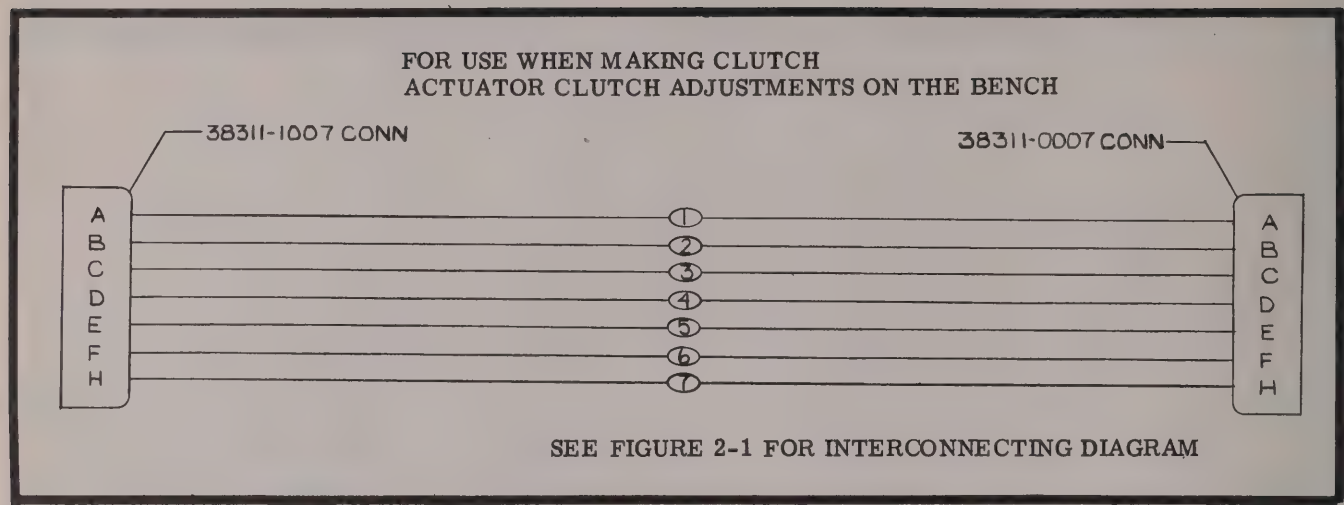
9799007 PA500A Actuator Adapter Cable Assembly
